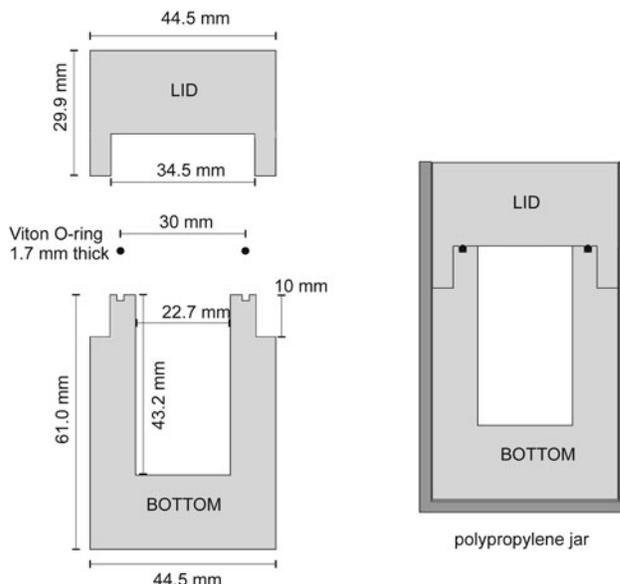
Cross-section of the cylindrical grinding vessel designed for miniaturized milling.
